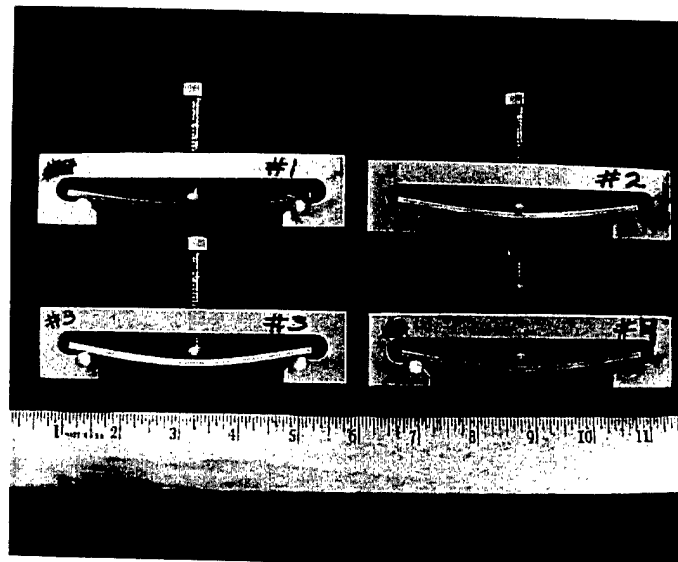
Fixtures used for the stress corrosion testing of bent beam specimens (reduced 64%).
